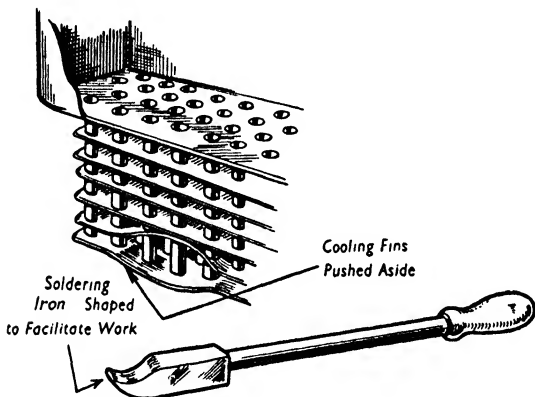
SOLDERING IRON SHAPED FOR USE IN RADIATOR REPAIRS
